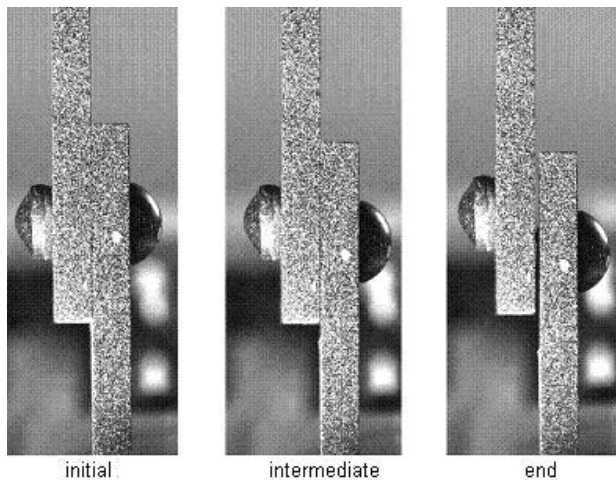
Shearing process of riveted joints with rectangular sheets in experiment.
